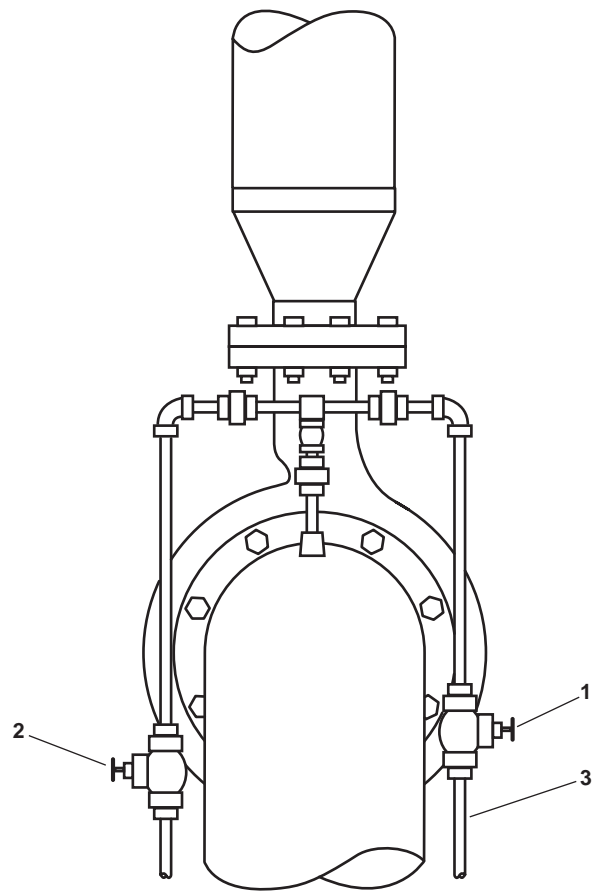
Diesel Engine-Driven Firefighting Pump Priming Valves
